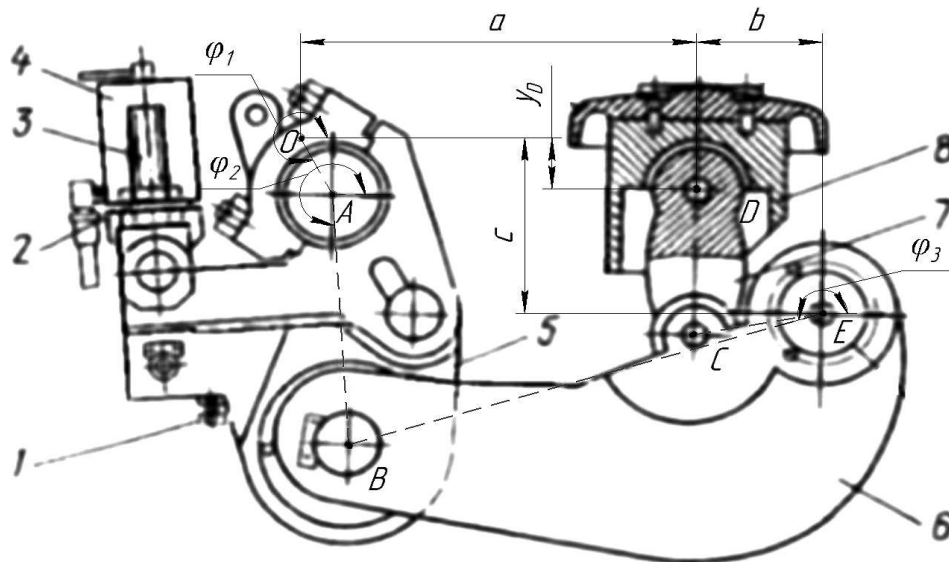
The kinematic scheme of the pressing lever mechanism: 1) adjusting screw; 2) and 3) parts of auxiliary threaded joint; 4) hydrocylinder of pressure stabilizer; 5) split rod AB; 6) lever BE; 7) link CD; 8) pressing piston; φ_1 , φ_2 and φ_3 are turning angles of crank OA, members AB and BE, correspondingly; a , b and c are the coordinates of kinematic pairs connected with the stand.
